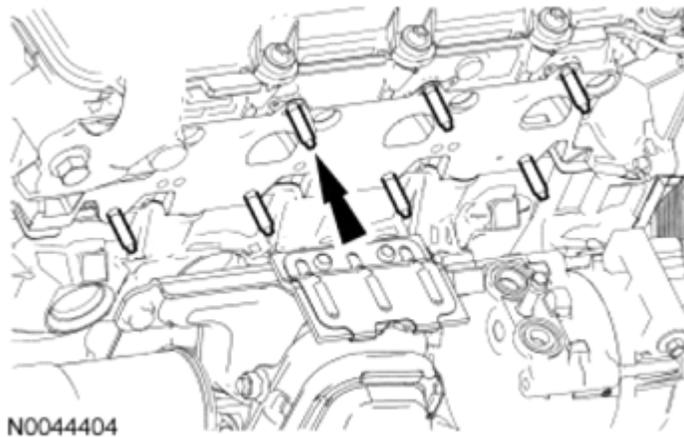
Locating Exhaust Manifold-To-Cylinder Head Studs (RH)
